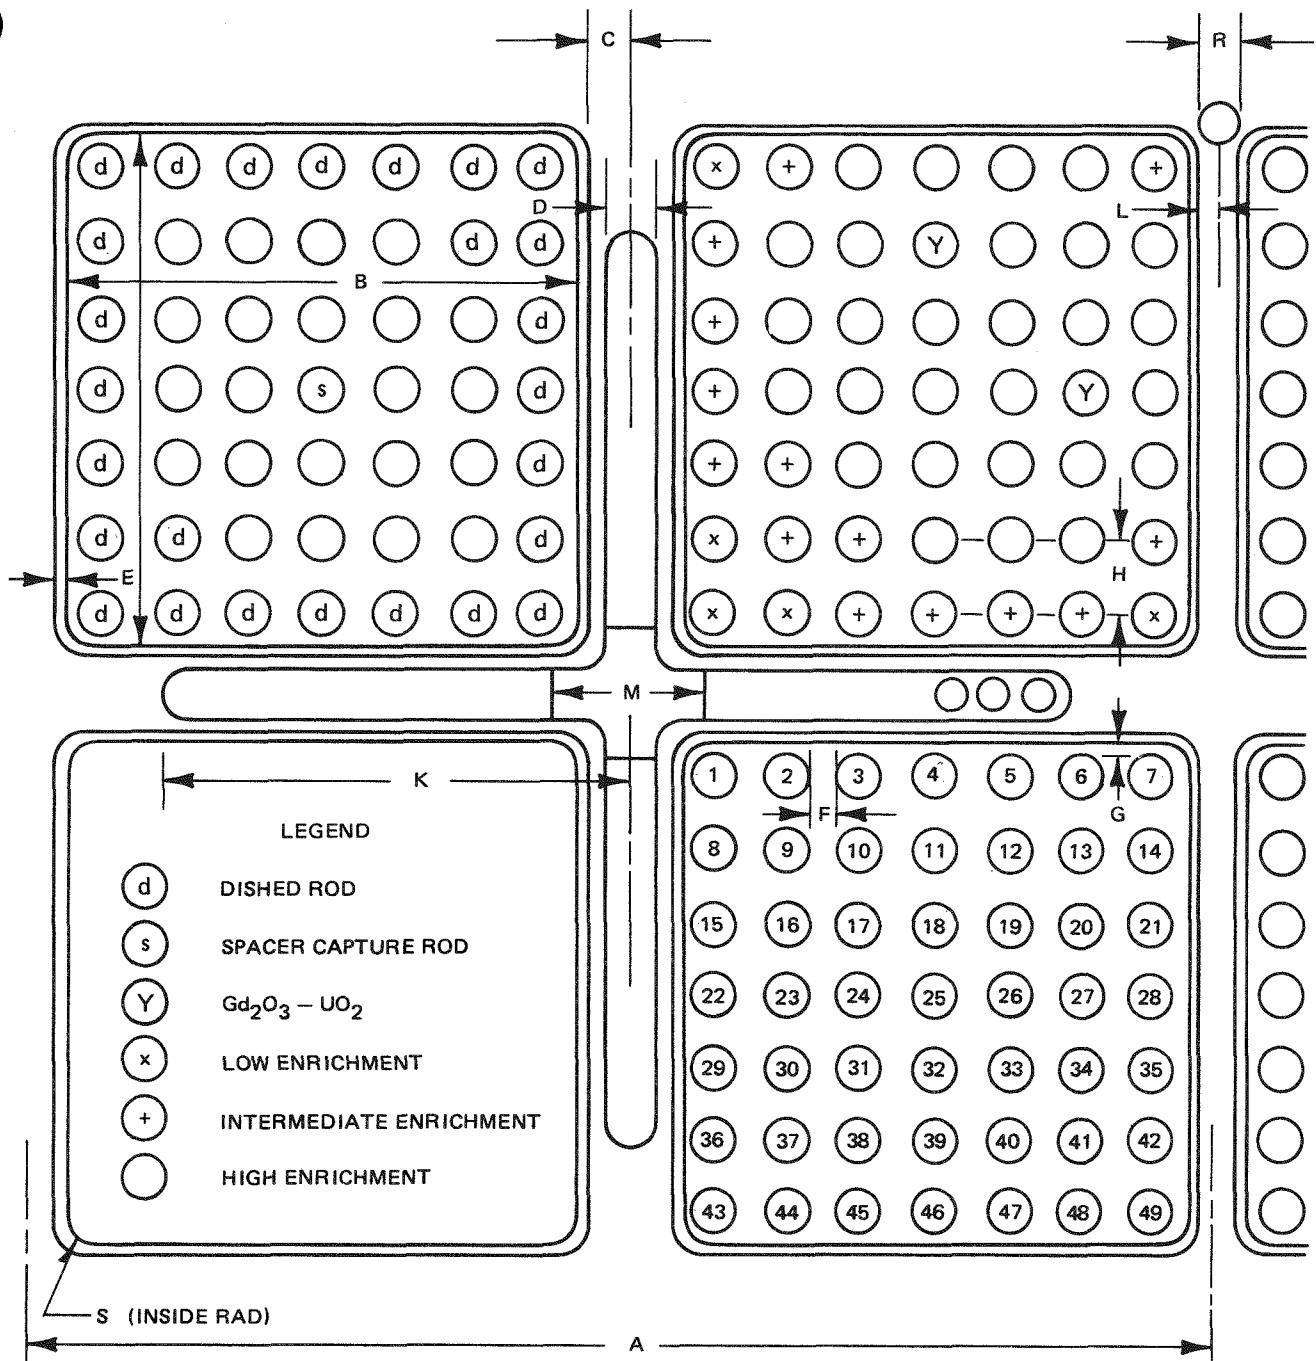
Type 2 Gd_2O_3 Fuel Assembly Lattice
